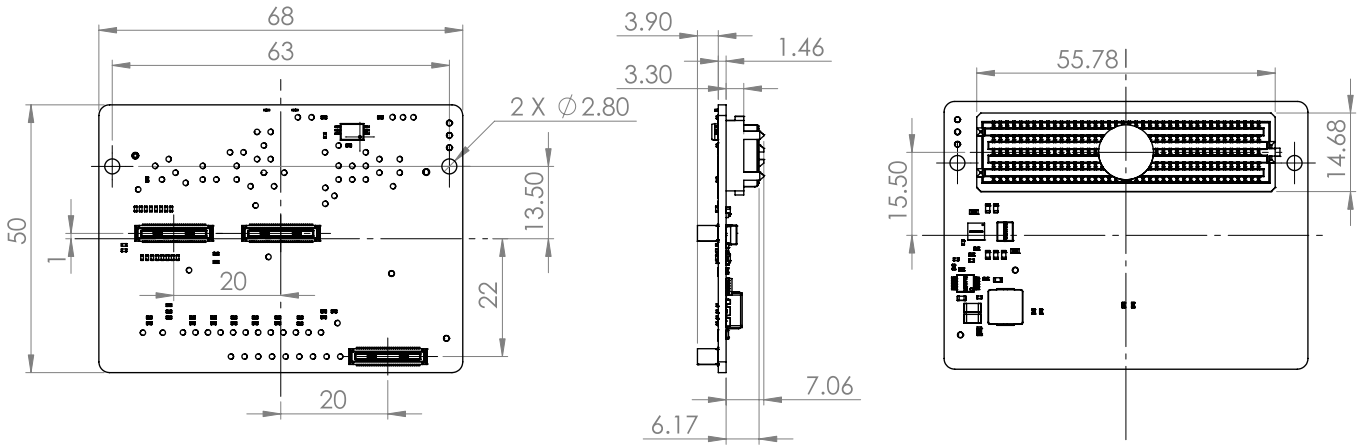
Technical Drawing of FPA-4.A/TXA-V1
